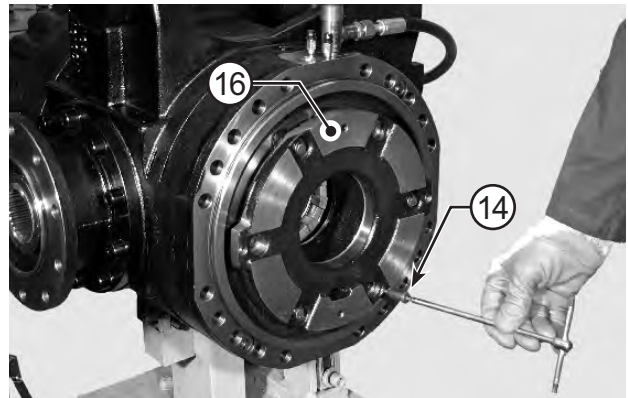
Remove the adjusting screws (14) from the counterwasher (16).
